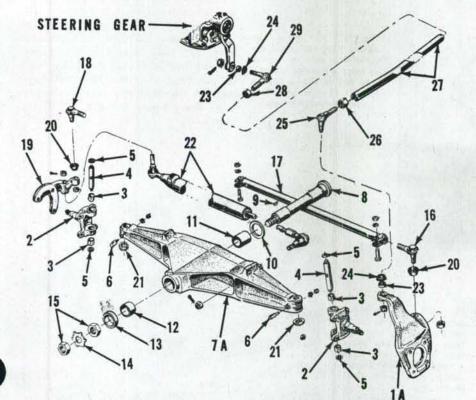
Exploded view (from rear) of front axle assembly used on early Heavy Duty Industrial tractor with full power steering.
